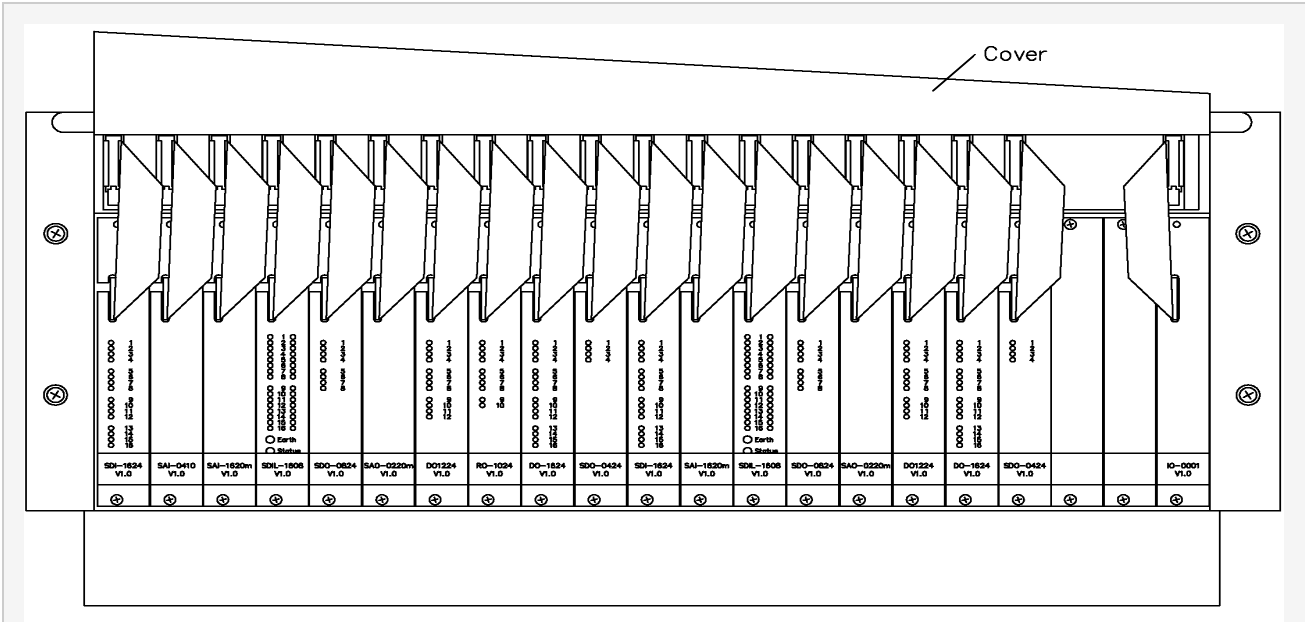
Front view of a filled, open IOCHAS-0003S
